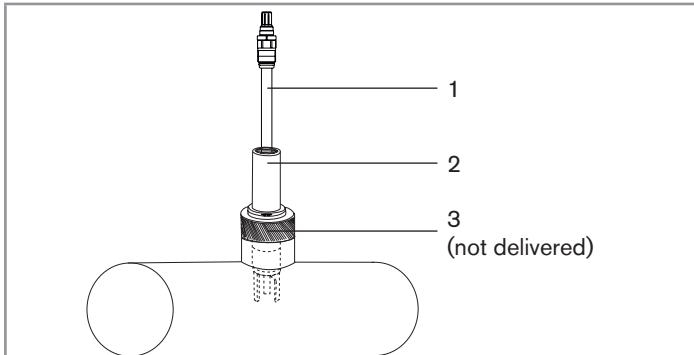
Installation of a 8221 with a PG13.5 connection onto a direct welding holder
